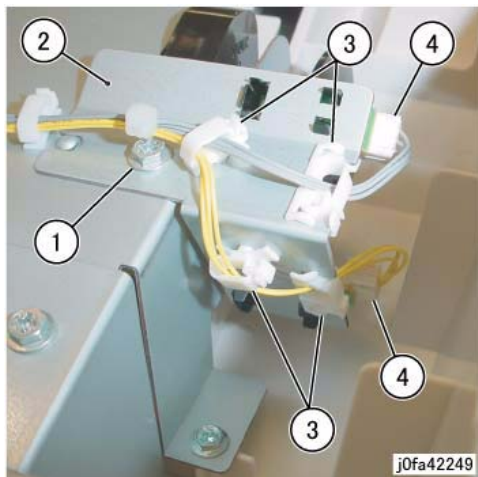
Removing the Stacker Sensor Assembly (j0fa42249)
